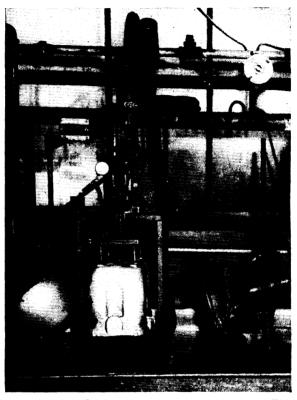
Pressure-testing fixture for a gas-meter housing. The openings are sealed with rubber pads, air is forced into the inside of the casting, and the entire fixture is then immersed in water.
